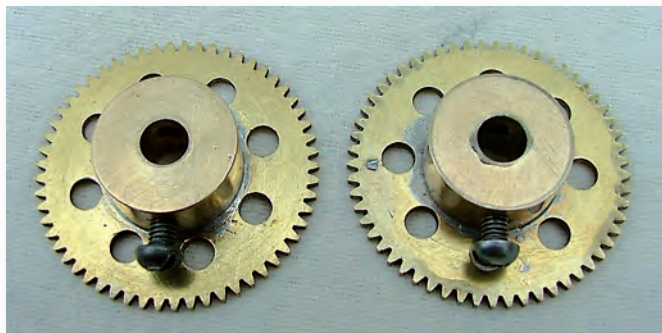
Renewing the centre boss by soldering on a larger unit.
